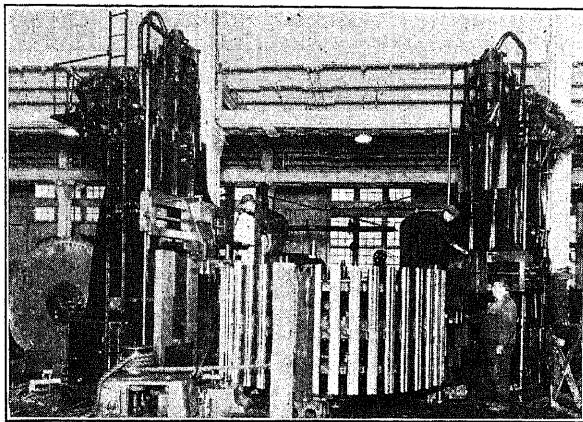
MACHINING ROTOR SPIDER OF 37,000-KV-A. 60/25-CYCLE 3-PHASE, 13,800/2700-VOLT INDUCTION FREQUENCY CONVERTER
